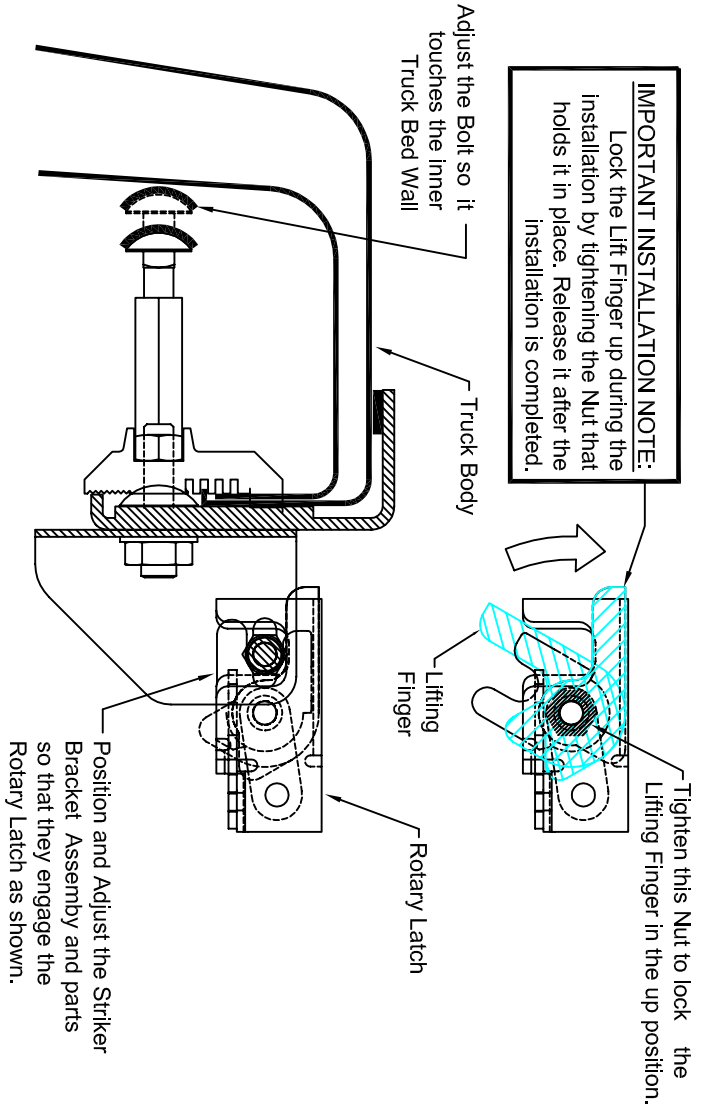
Section through Truck Bed Rail, Striker Bracket Assembly and Rotary Latch
